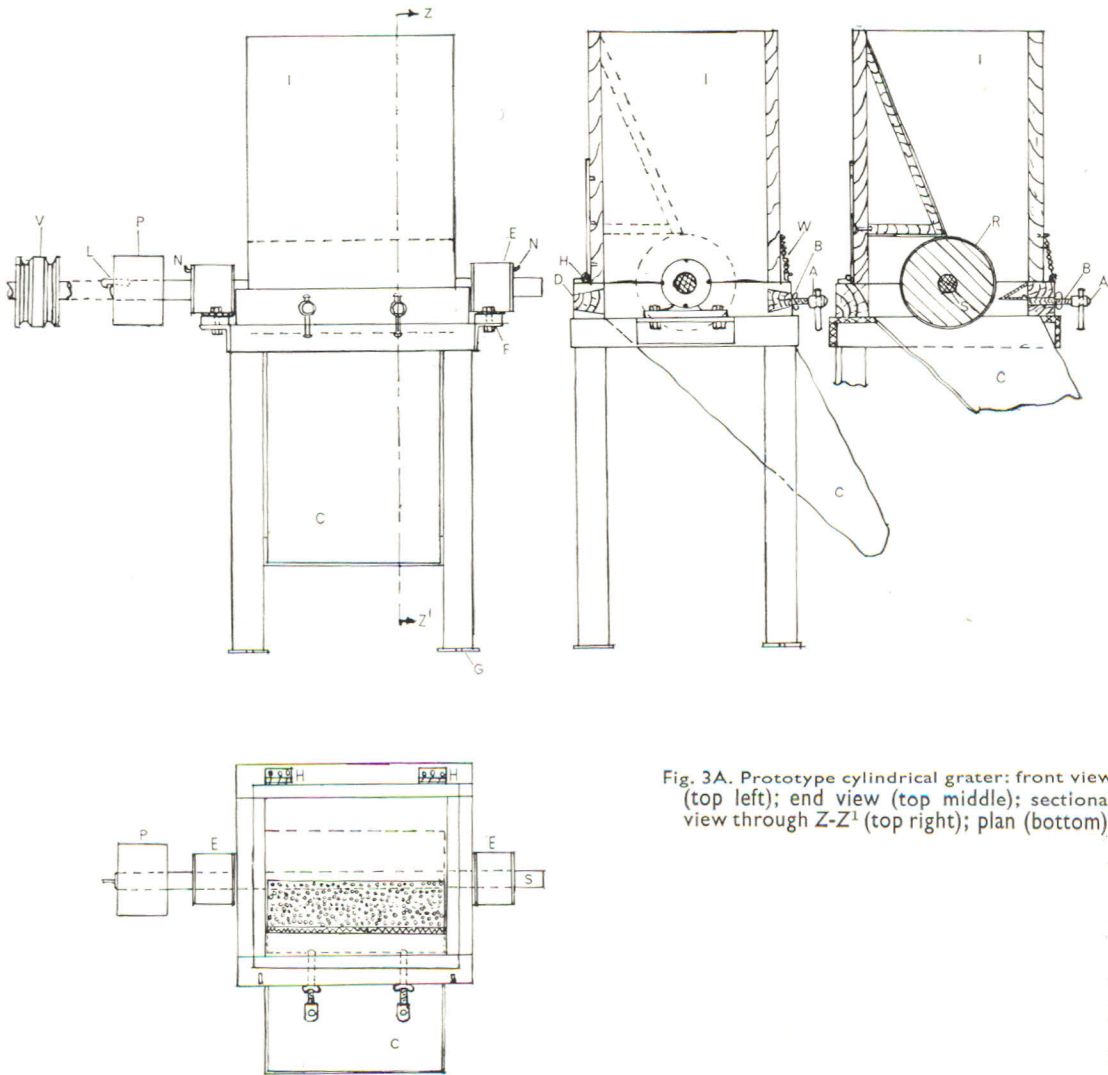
A. Prototype cylindrical grater: front view (top left); end view (top middle); sectional view through Z-Z' (top right); plan (bottom).
